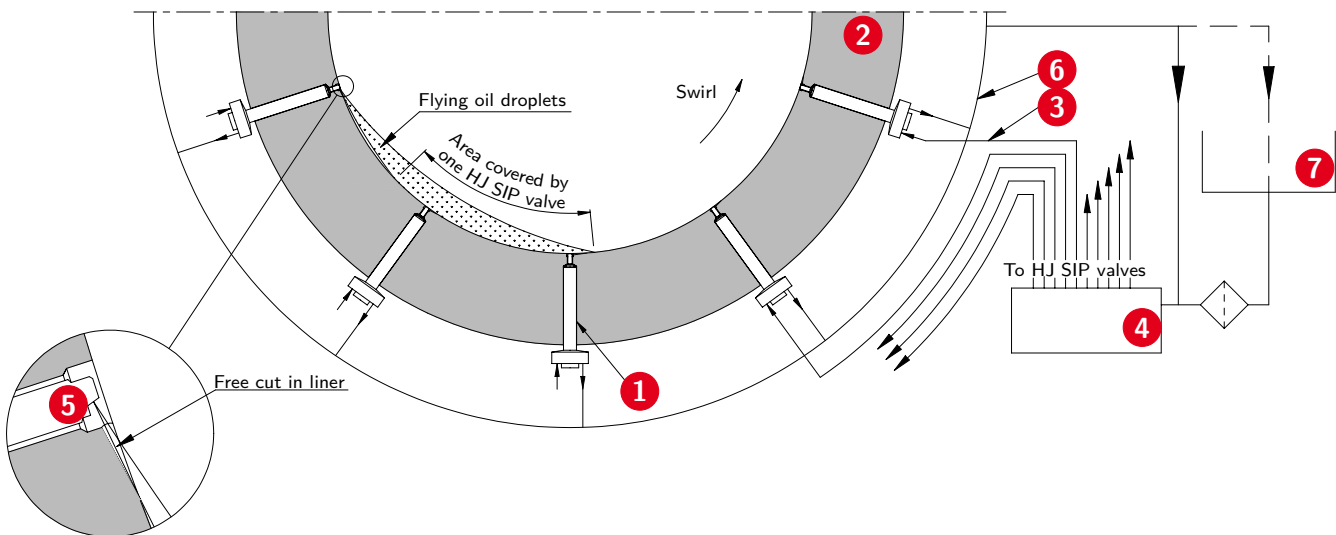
HJ SIP valves placement. Cut view of half a liner.
